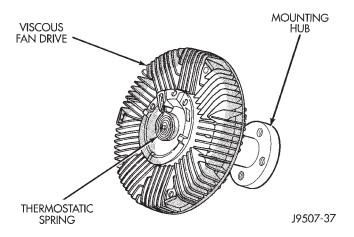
Viscous Fan Drive—4.0L Engine—Typical
